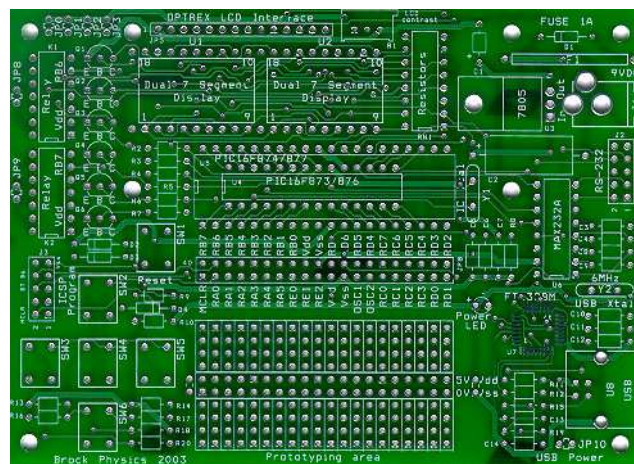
A PICLab printed circuit board, version 1.0, the component side
